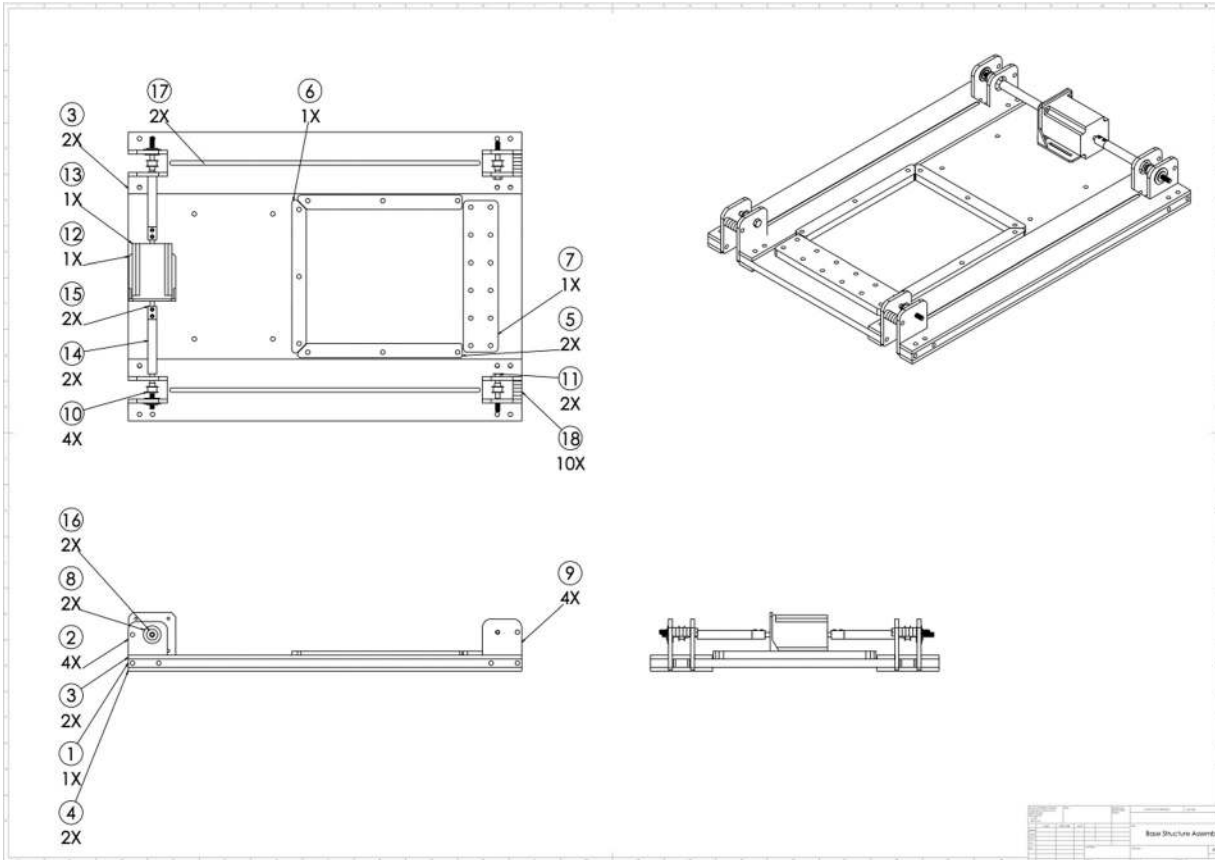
Base assembly: The base assembly of the device, which includes a driving stepper motor with idler pulleys opposite it for X-axis control via timing belt, offers a work envelope of 7.5 in (190.5 mm) in the X-axis and 8.75 in (222.25 mm) in the Y-axis
